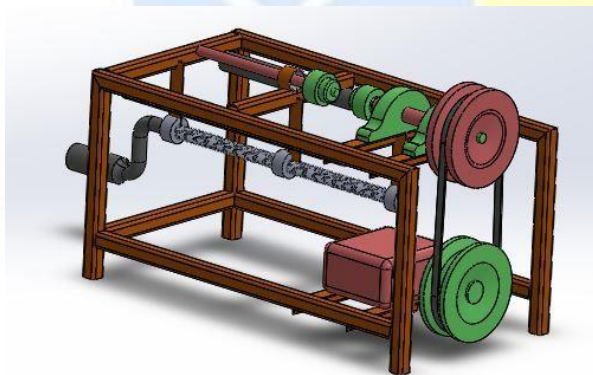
3D Model Of Rotary Friction Welding By Using Steel Pipes
